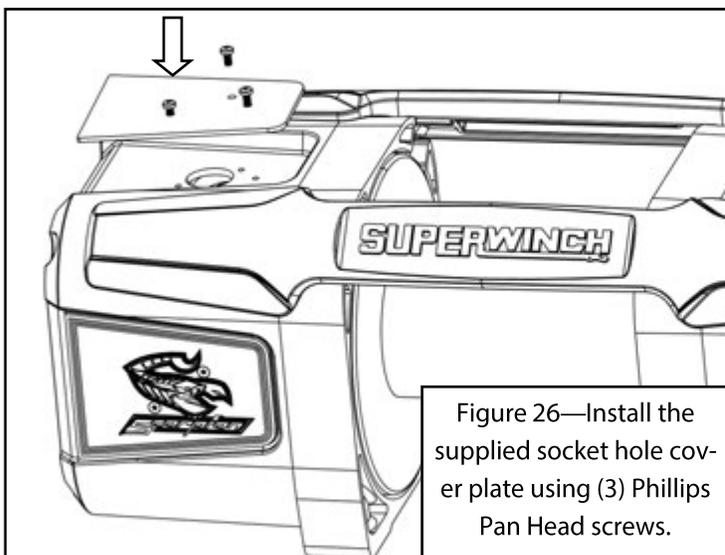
Install the supplied socket hole cover plate using (3) Phillips Pan Head screws.
